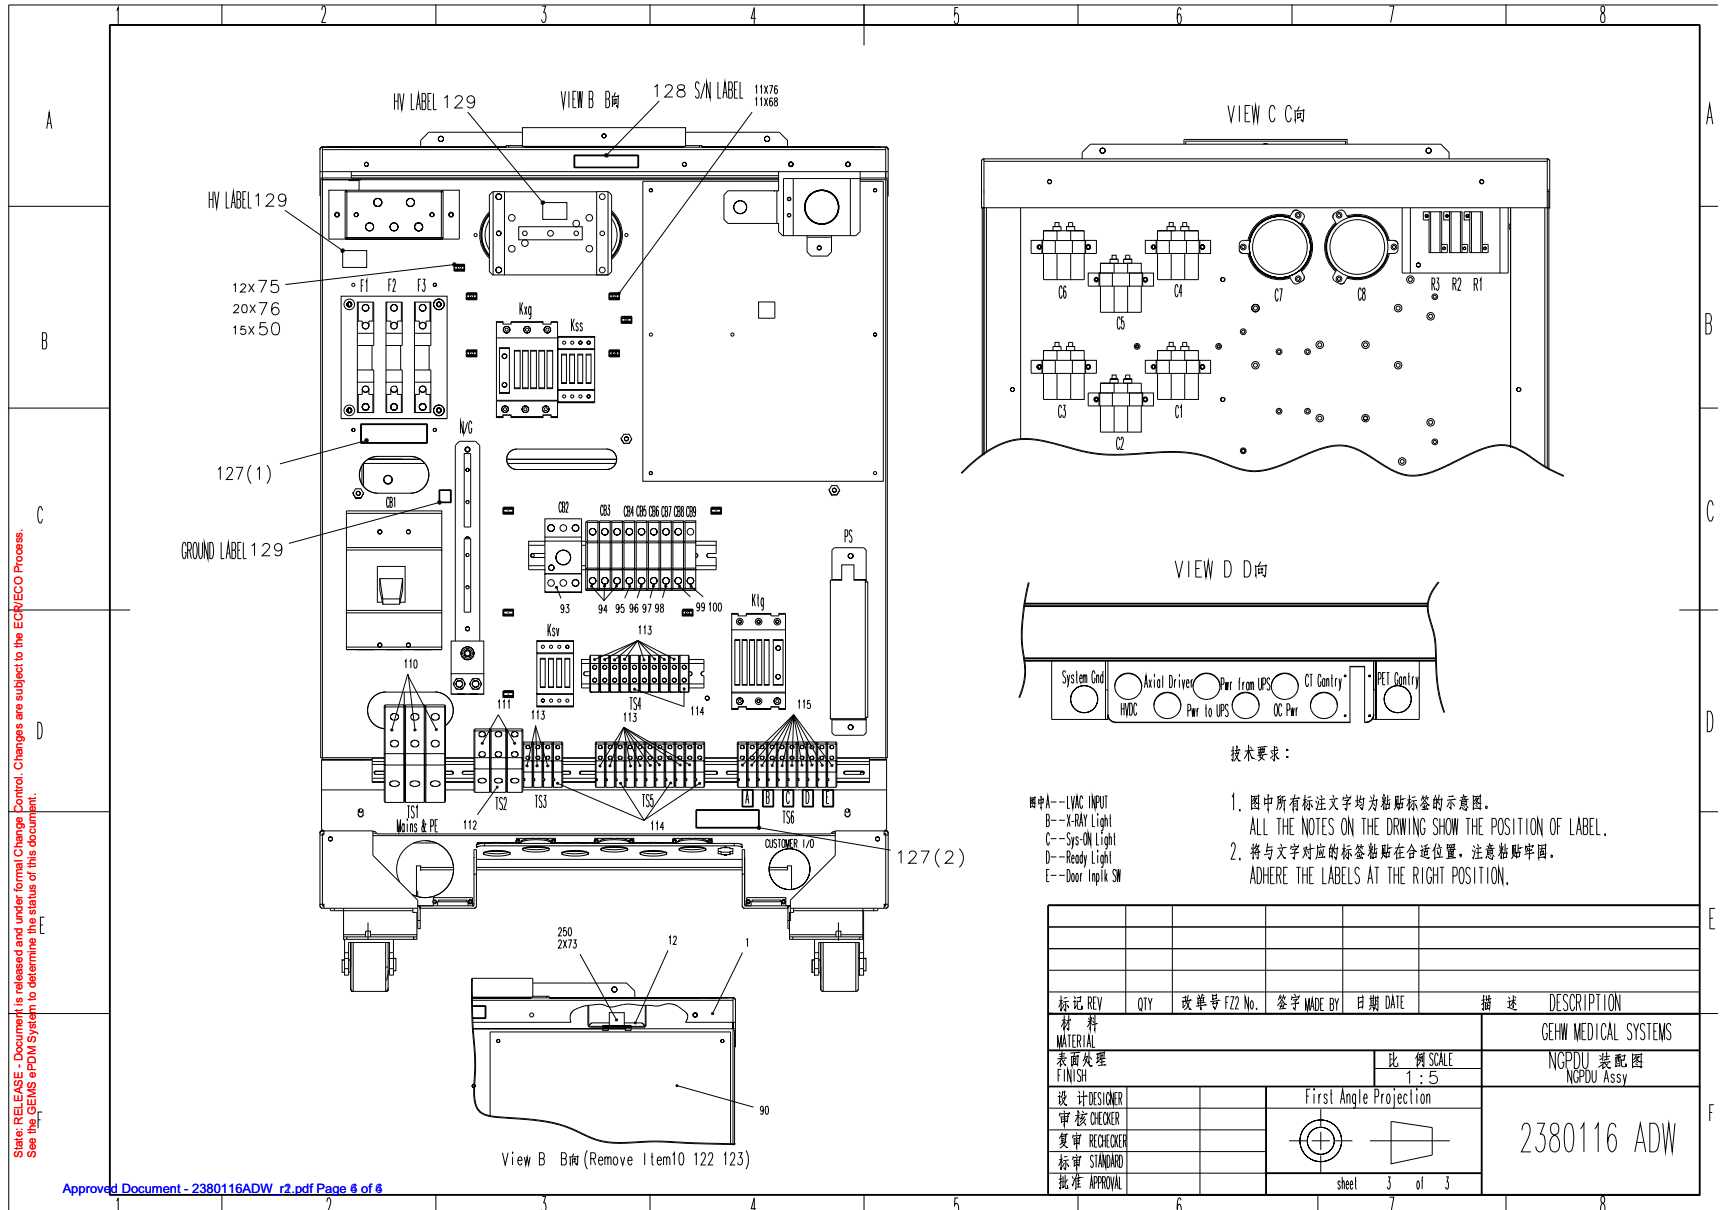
NGPDU ASSEMBLY3 (2380116ADW, sheet 3, rev 2)
